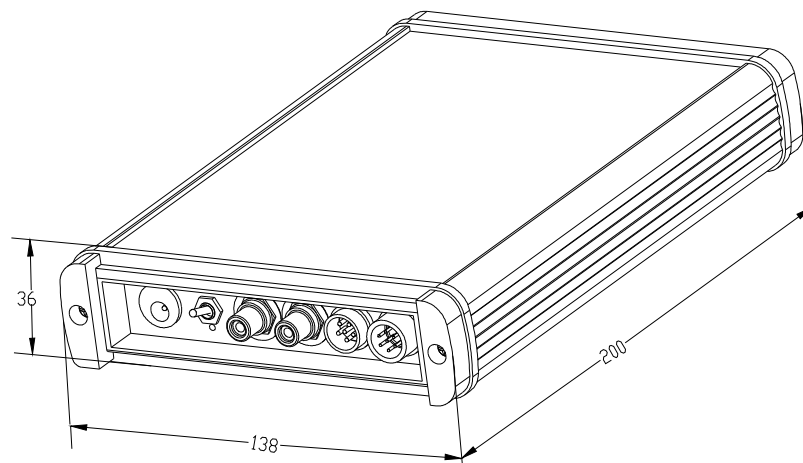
Outline Drawing of the Flowmeter (in mm)
